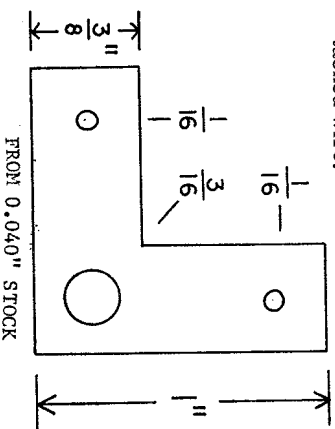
Drawing showing how to make a suitable bracket for the rear of the machine.
